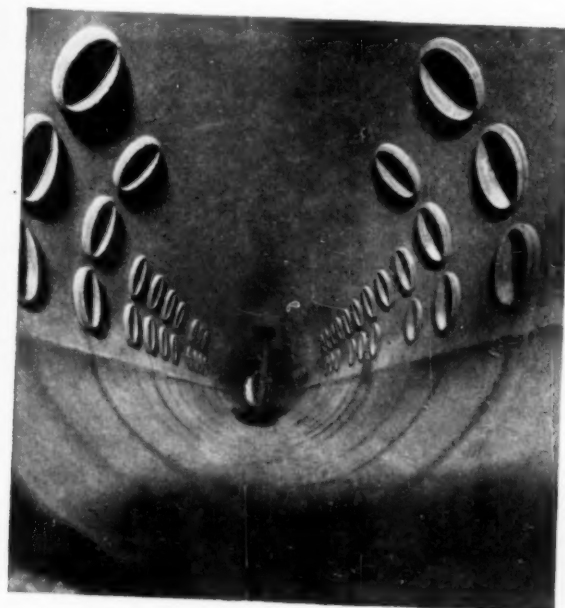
BOTTOM DRUM OF NO. 7 BOILER
